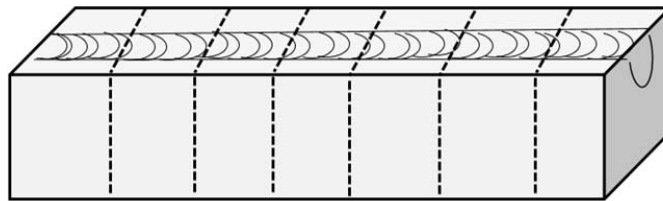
The prepared and welded coupons under the bead weld configuration in this work.
